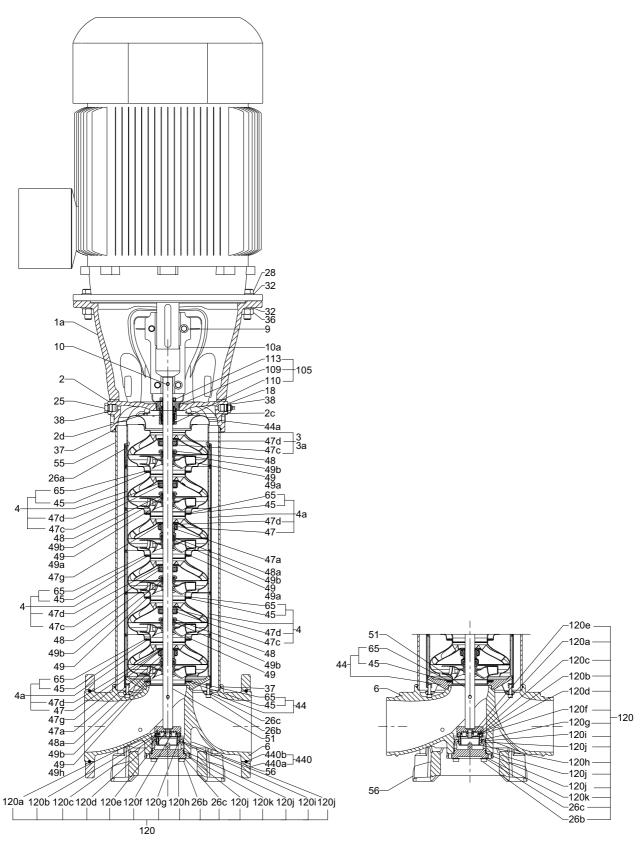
Sectional view of CR, CRN pump with $\varnothing 28$ or $\varnothing 36$ shaft and with thrust-handling device
